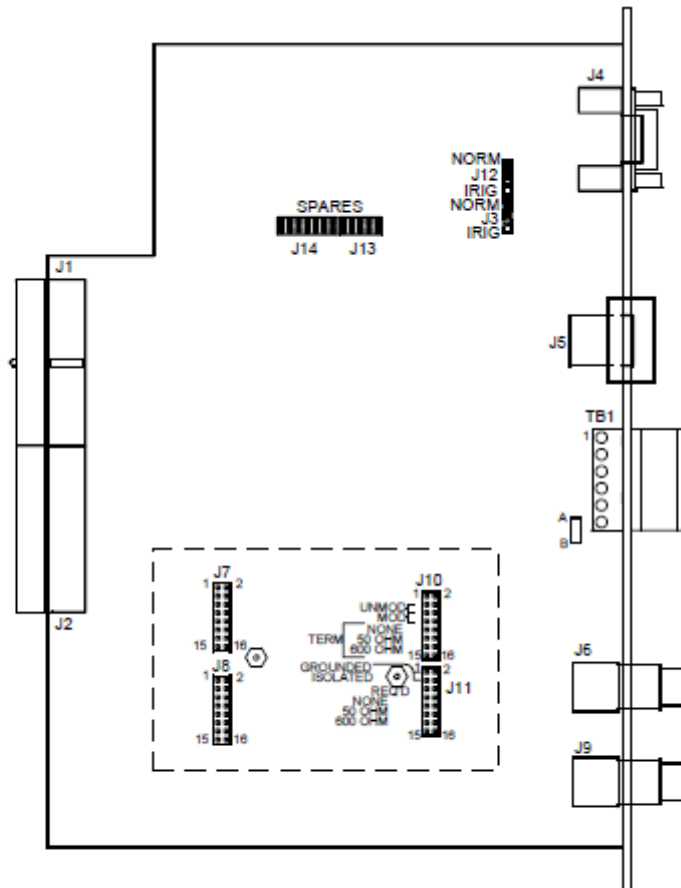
GARD 8000 6U System I/O module, board view showing jumper locations
